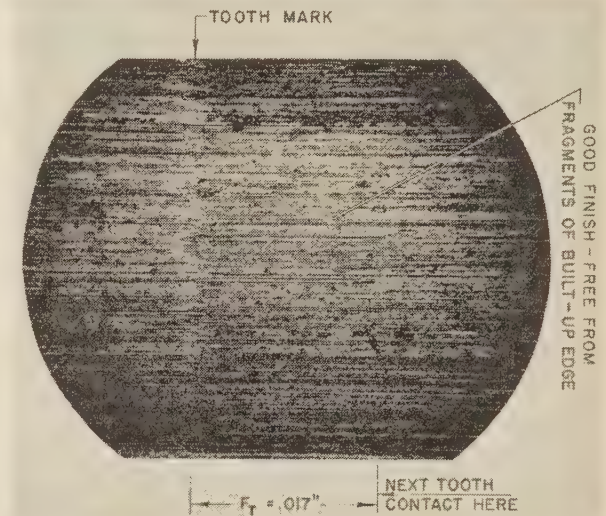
PHOTOMICROGRAPH OF MILLED SURFACE SHOWING TOOTH MARK AND POSITION OF NEXT TOOTH CONTACT
